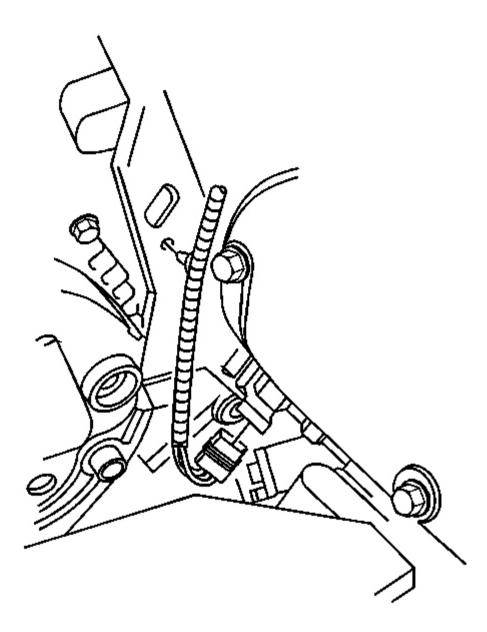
Engine Coolant Temperature Switch Electrical Connector Courtesy of GENERAL MOTORS CORP.
